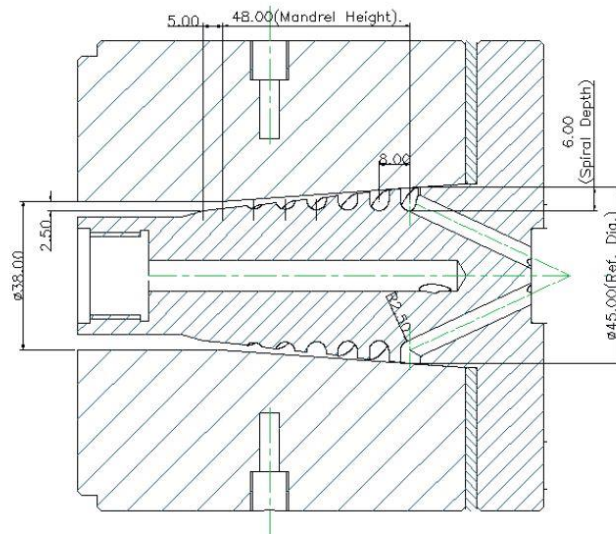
Spiral die drawing with dimensions in millimeters. From Kainth (2018).
